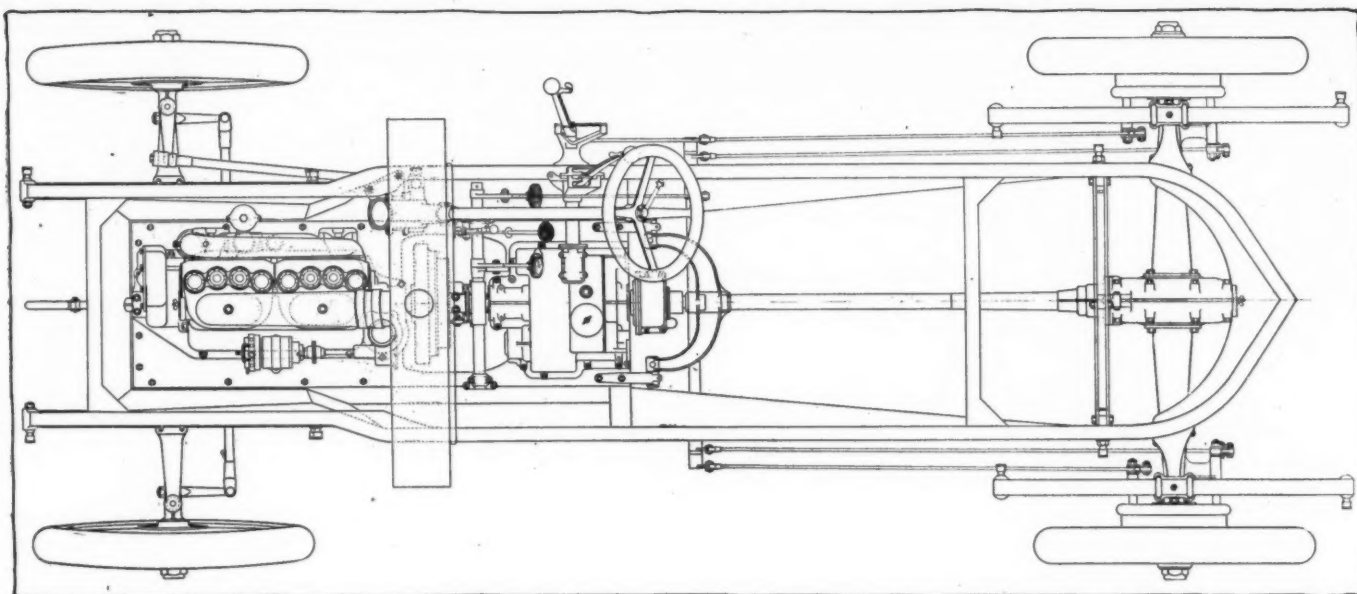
Plan view of the four-cylinder 15.9 horsepower Arrol-Johnston chassis, showing the unique rear junction of frame side members
